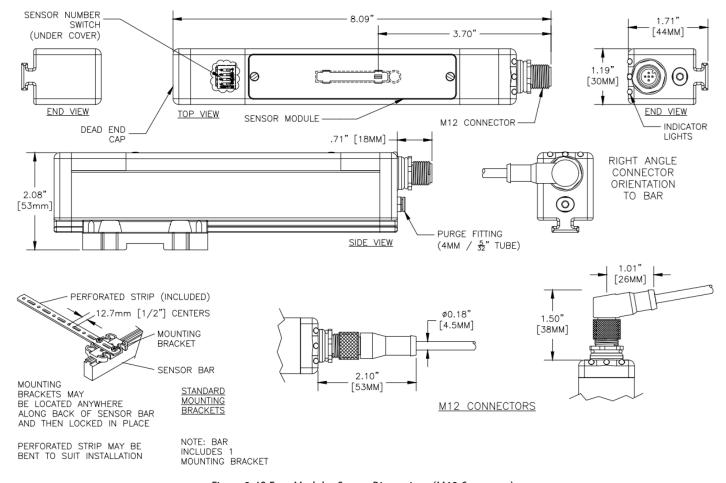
IQ Easy Modular Sensor Dimensions (M12 Connector)
